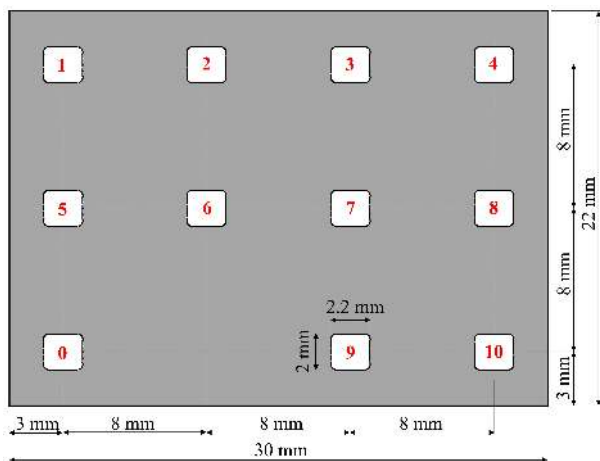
Arrangement of the machined points (white color) on the workpiece.
